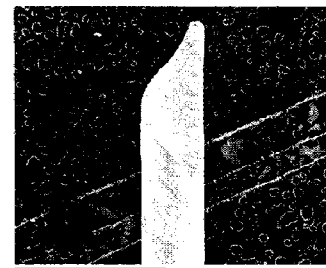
Fracture shape of the 7th pass(D = 1.200 mm)
